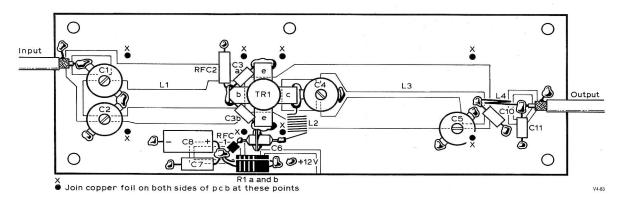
Transmitter PA board, actual size, and component layout. This board is double-sided (see text)
